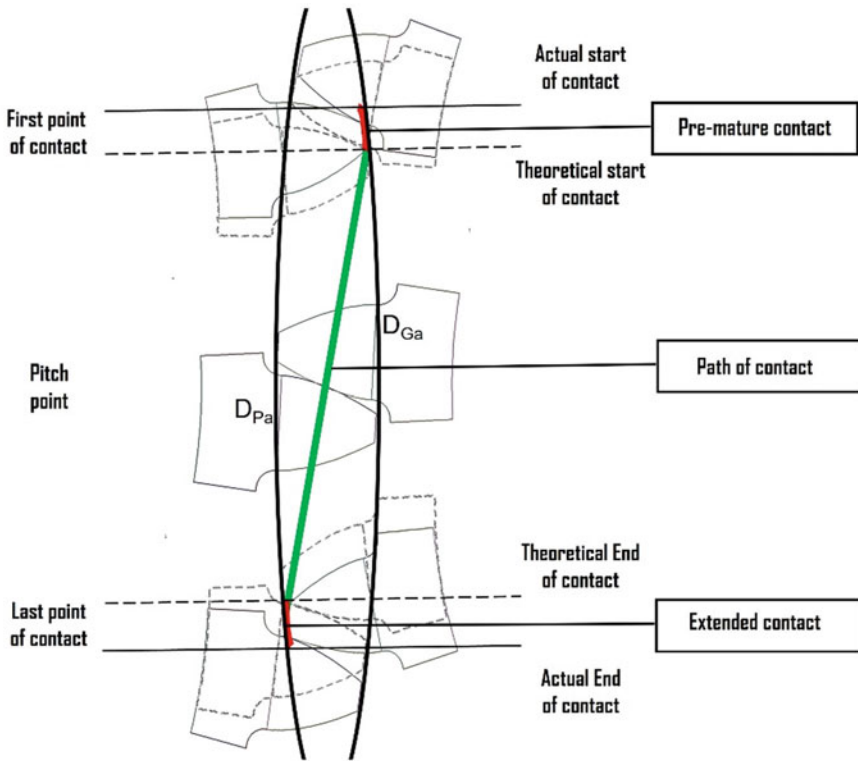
Pre-mature and extended contact in the PA 6 and PA 6,6 gears
